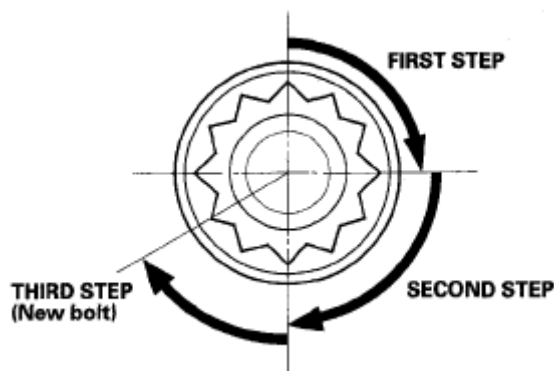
Identifying Cylinder Head Bolt Tightening Steps
